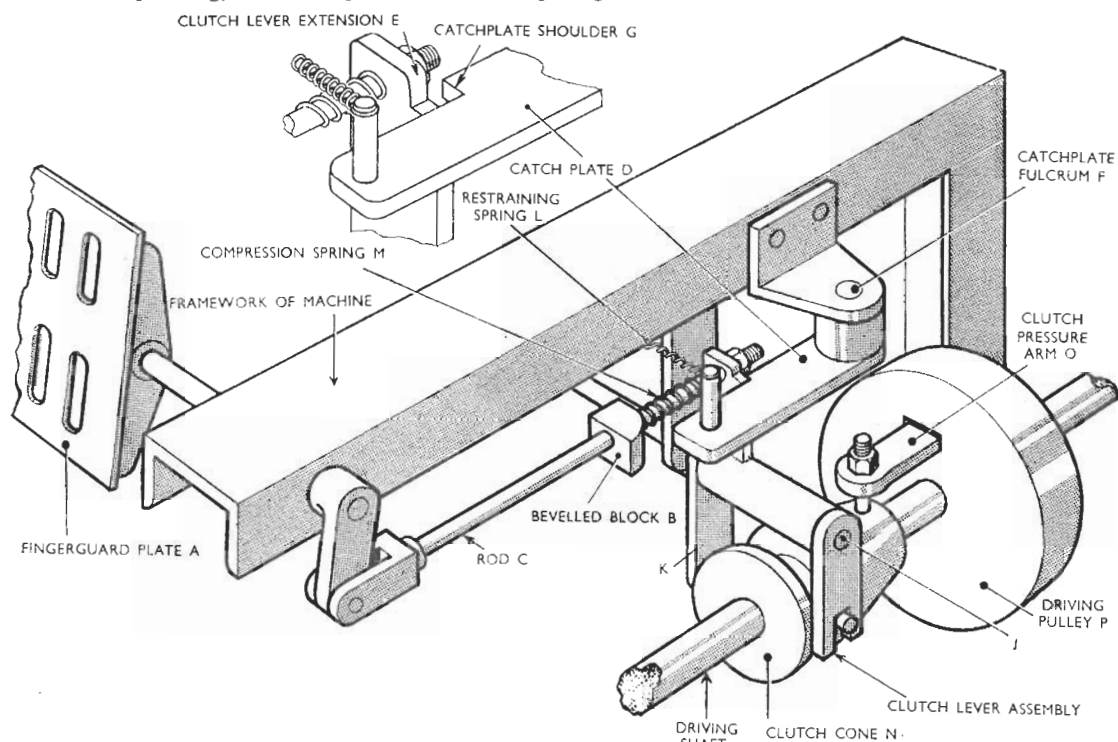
Automatic fingerguard device for 56 × 25-in. return feed flatwork ironing machine.
